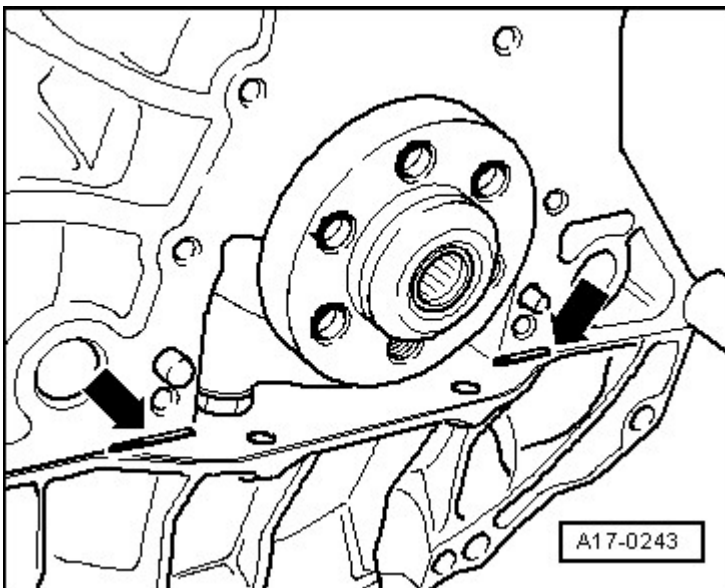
Sealant Applied To Edge Between Cylinder Block And Oil Pan
